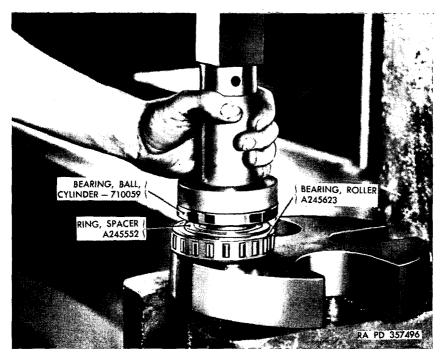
Pressing rear ball bearing onto cylinder, piston, and shaft assembly.
